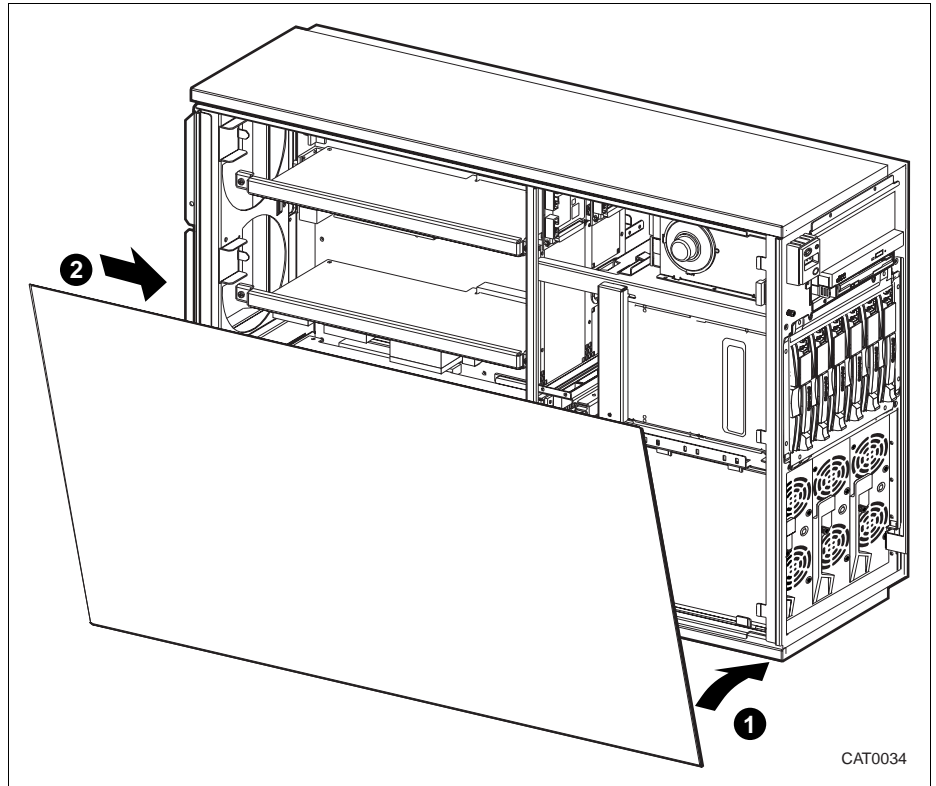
Removing and Replacing the Side Panel on a Pedestal System
